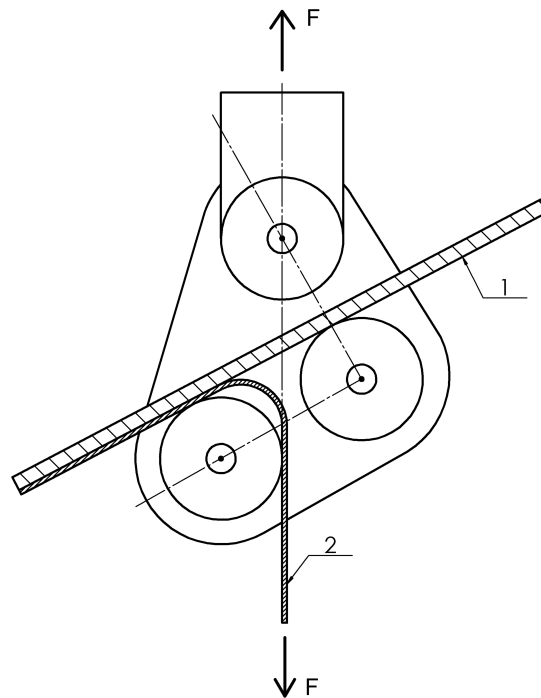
Floating roller method - peel test fixture and specimen adjustment;
